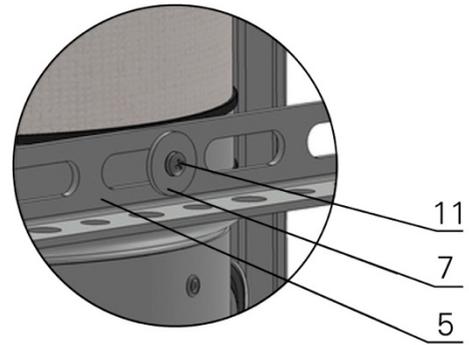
Suspension ring and mounting rail connected by screw or rivet
